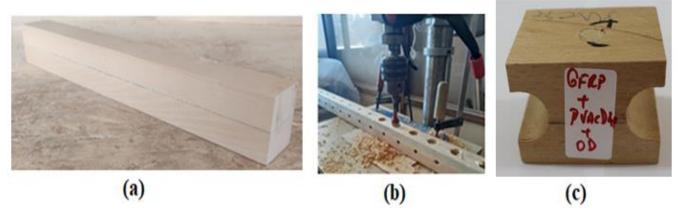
Manufacturing process for experimental samples: a) Slats, b) Hole drilling process, and c) Test samples
